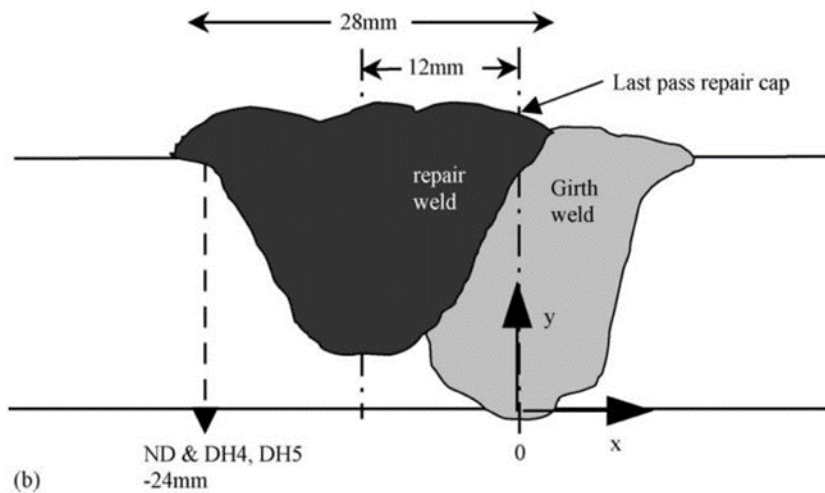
Repair weld schematic of 316H SS pipe girth welds [46]
